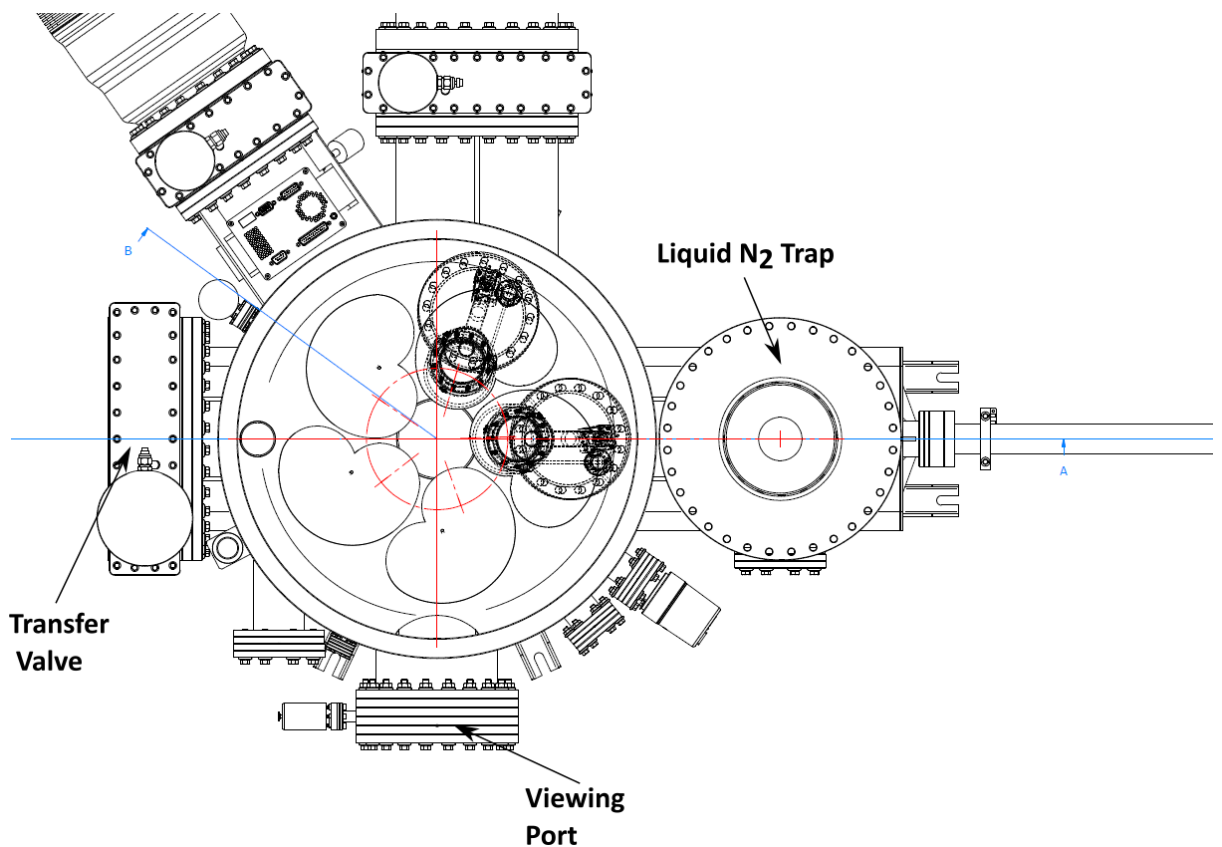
Technical drawing of the cross-section of the deposition system.
